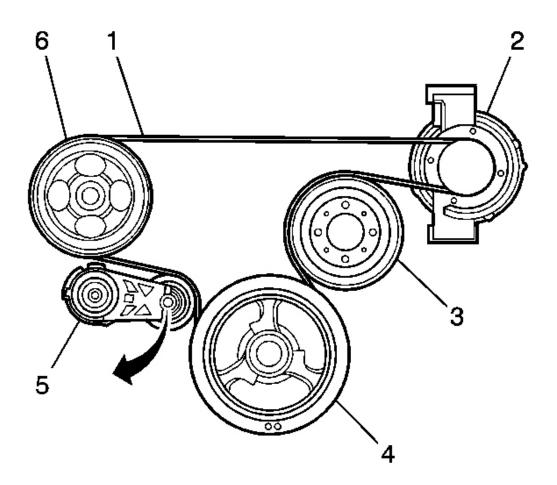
View Of Drive Belt & Pulleys (Without A/C) Courtesy of GENERAL MOTORS CORP.
